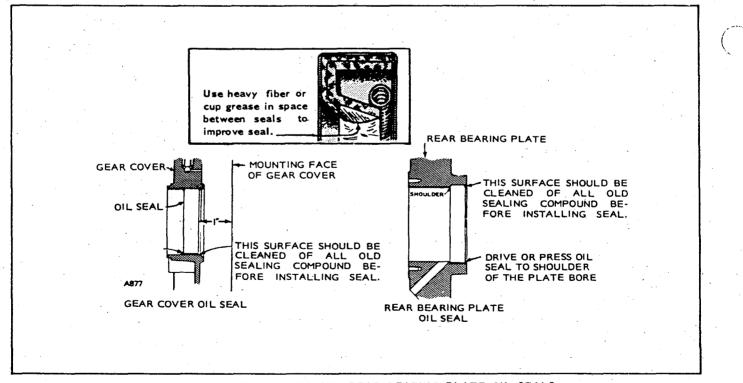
GEAR COVER AND REAR BEARING PLATE OIL SEALS
